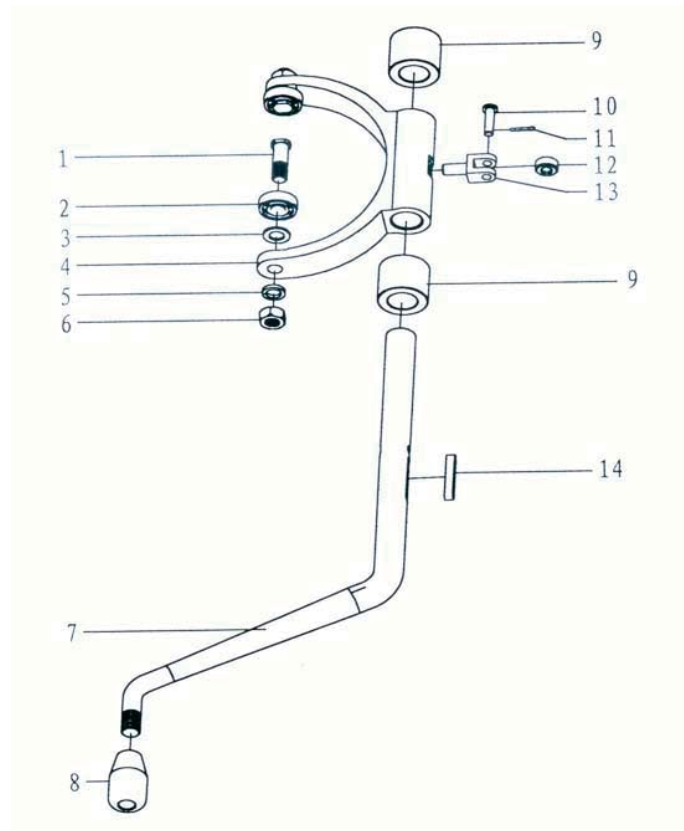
Gear Shifting Mechanism Assembly (Lower)
